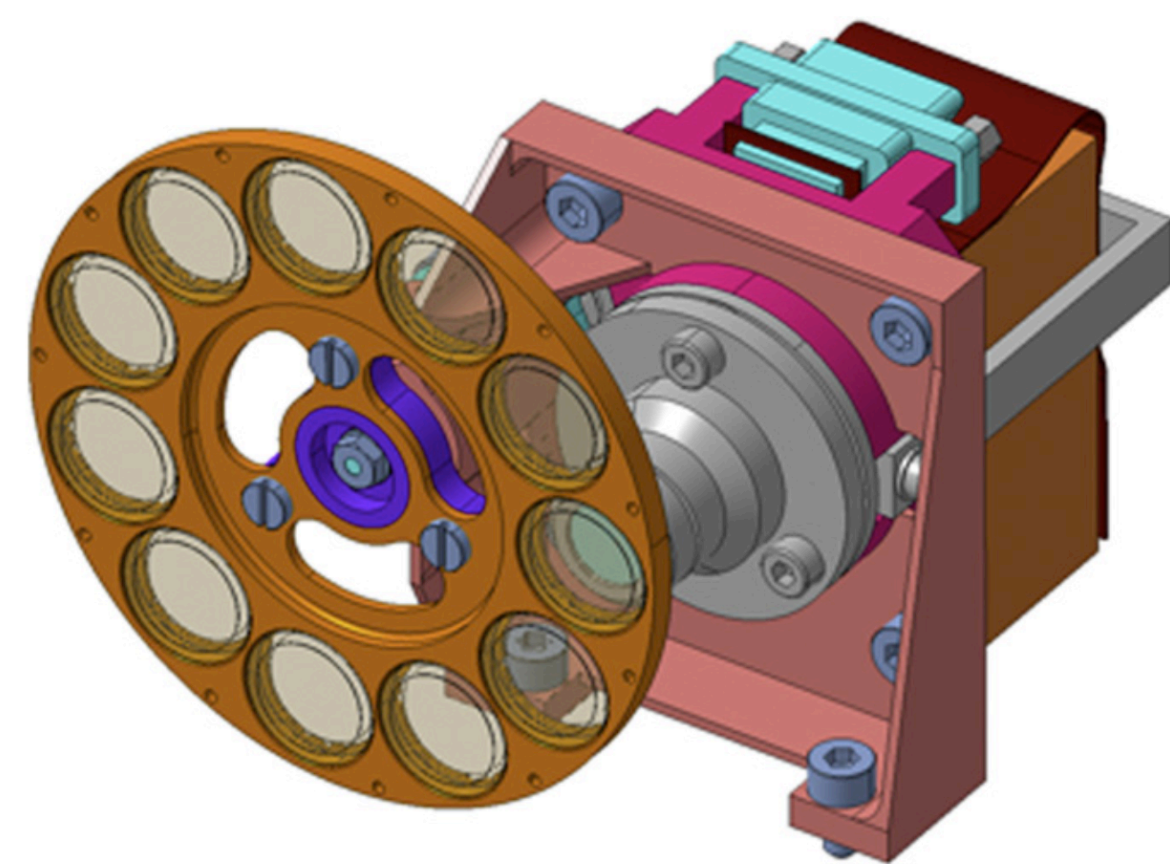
WAC assembly CAD Model, illustrating the filter wheel and camera module. Credit: MSSL
